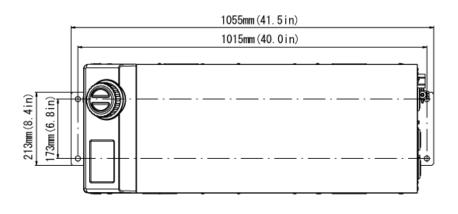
Fixtures and holding screws (This drawing is [HRS090-A-20].)
